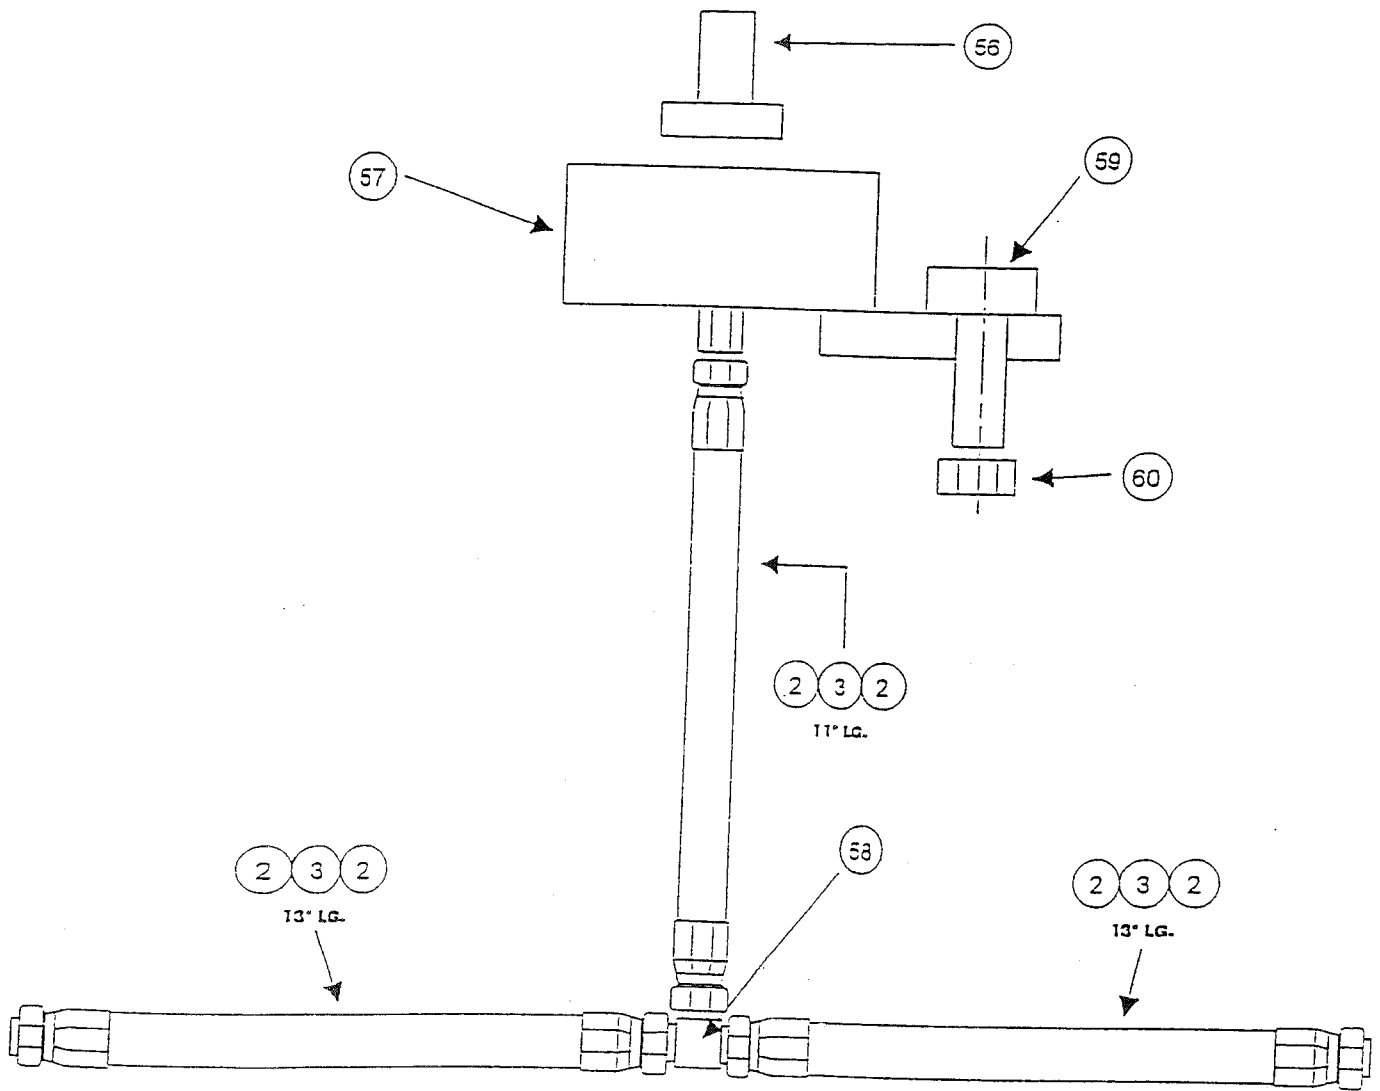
Drain and Fill Piping (sheet 4 of 5)
